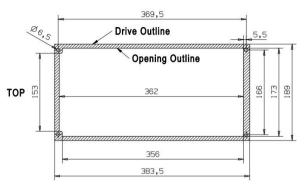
Flange mounting cutout dimensions for MI4 (Unit: mm)
